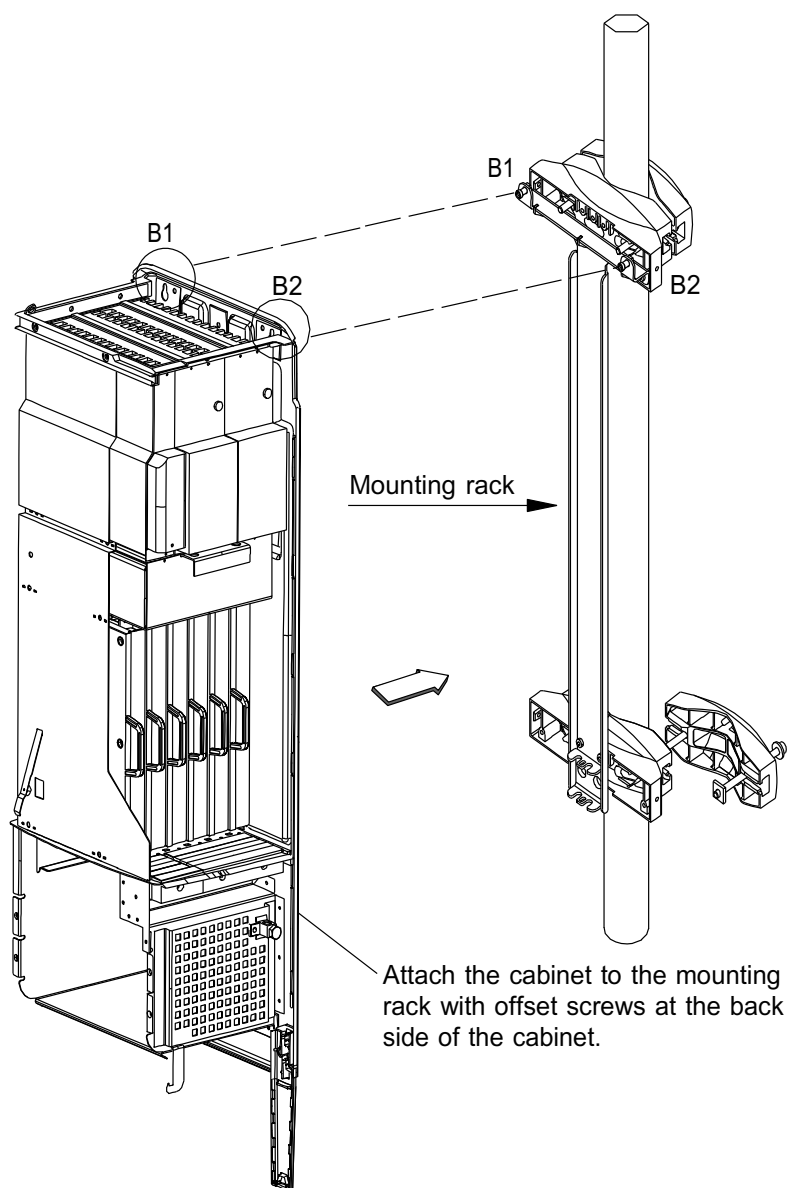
Pole mounting the cabinet (pole mounting kit version 1)
